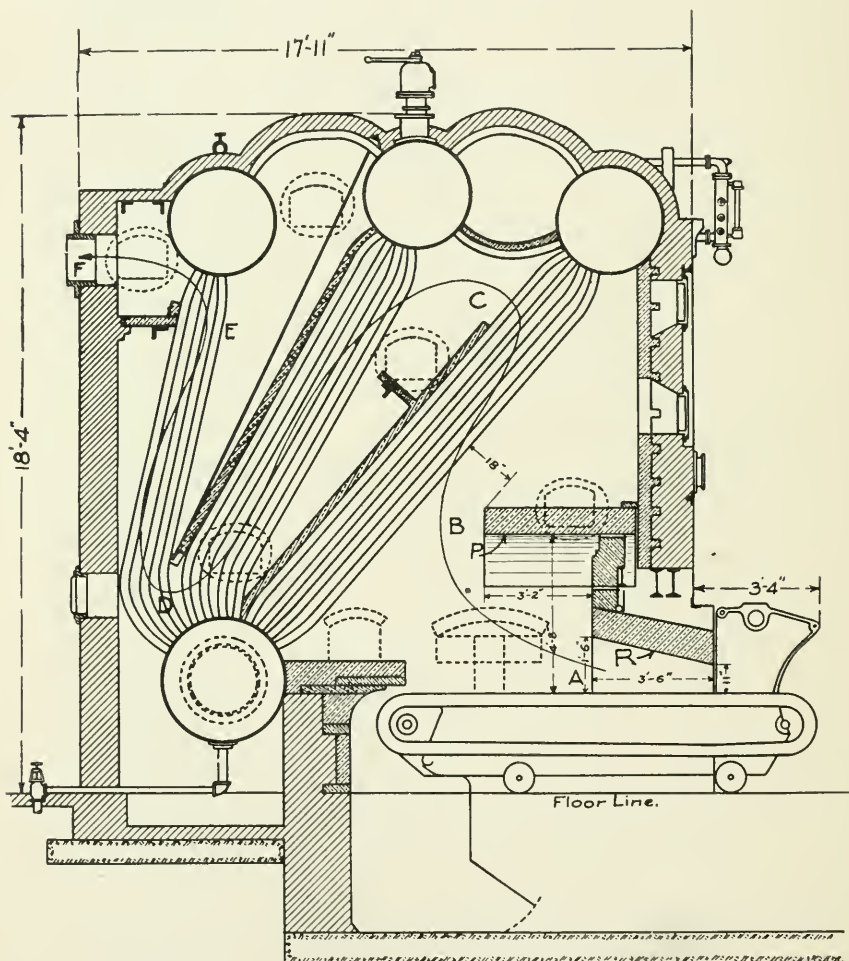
STIRLING STANDARD 260 H. P. BOILER EQUIPPED WITH CHAIN GRATES
